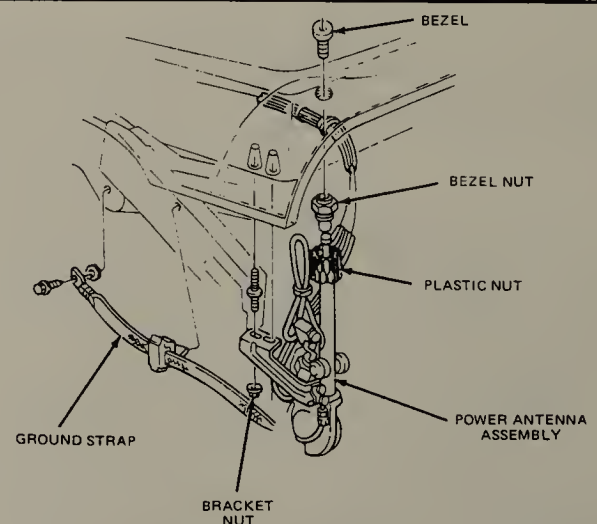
Power antenna removal and installation—1986 vehicle shown
